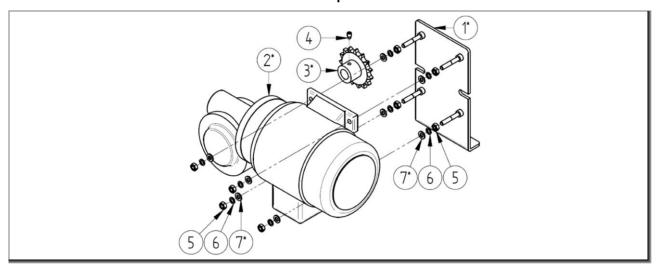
Parts list: External drive unit - motor unit - position of drive unit 14 - T.900.0001.02
